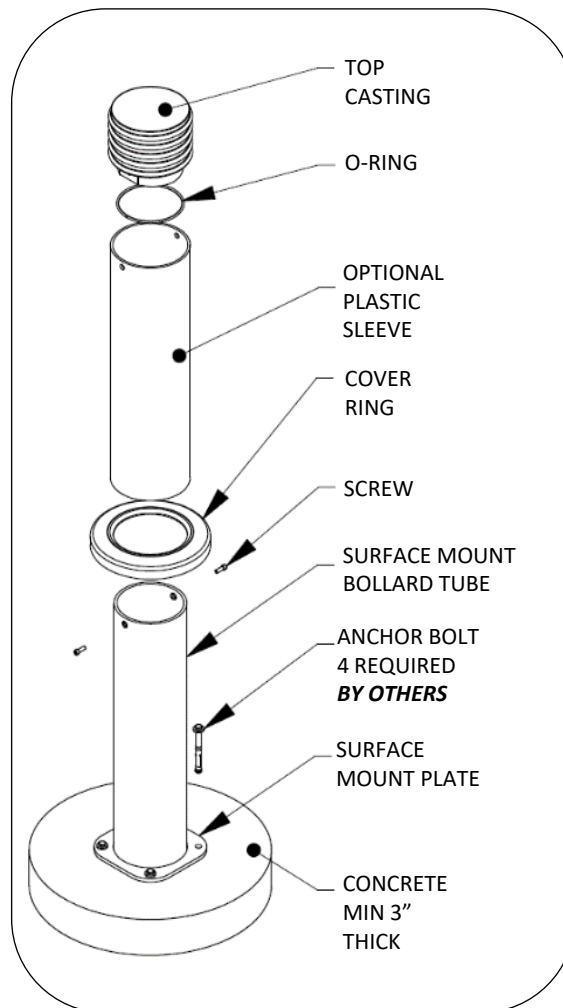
SURFACE MOUNT BOLLARD ASSEMBLY
